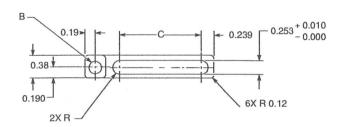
Fabrication of FFP Bracket Fixture Assembly, PN 9418101. (Sheet 4)
